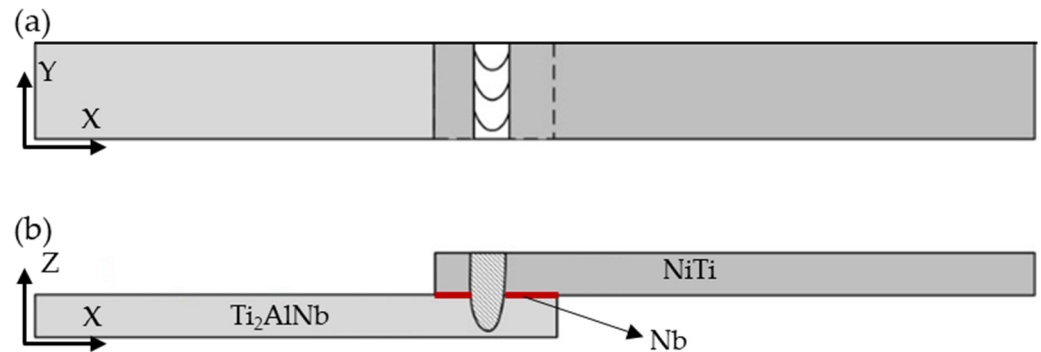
Schematic diagram of lap test: (a) Welded specimen in the X-Y plane; (b) Welded specimen in the X-Z plane.
